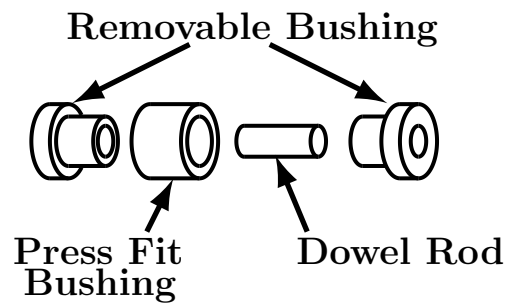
A four piece mold comprised of three drill bushings and a dowel rod. Internal surfaces were ground to prevent the casting material from adhering to the inside. The mold produces a tube which can later be cut into thin annular specimens. Reproduced with permission from [16]. Copyright (2017) Experimental Mechanics.
